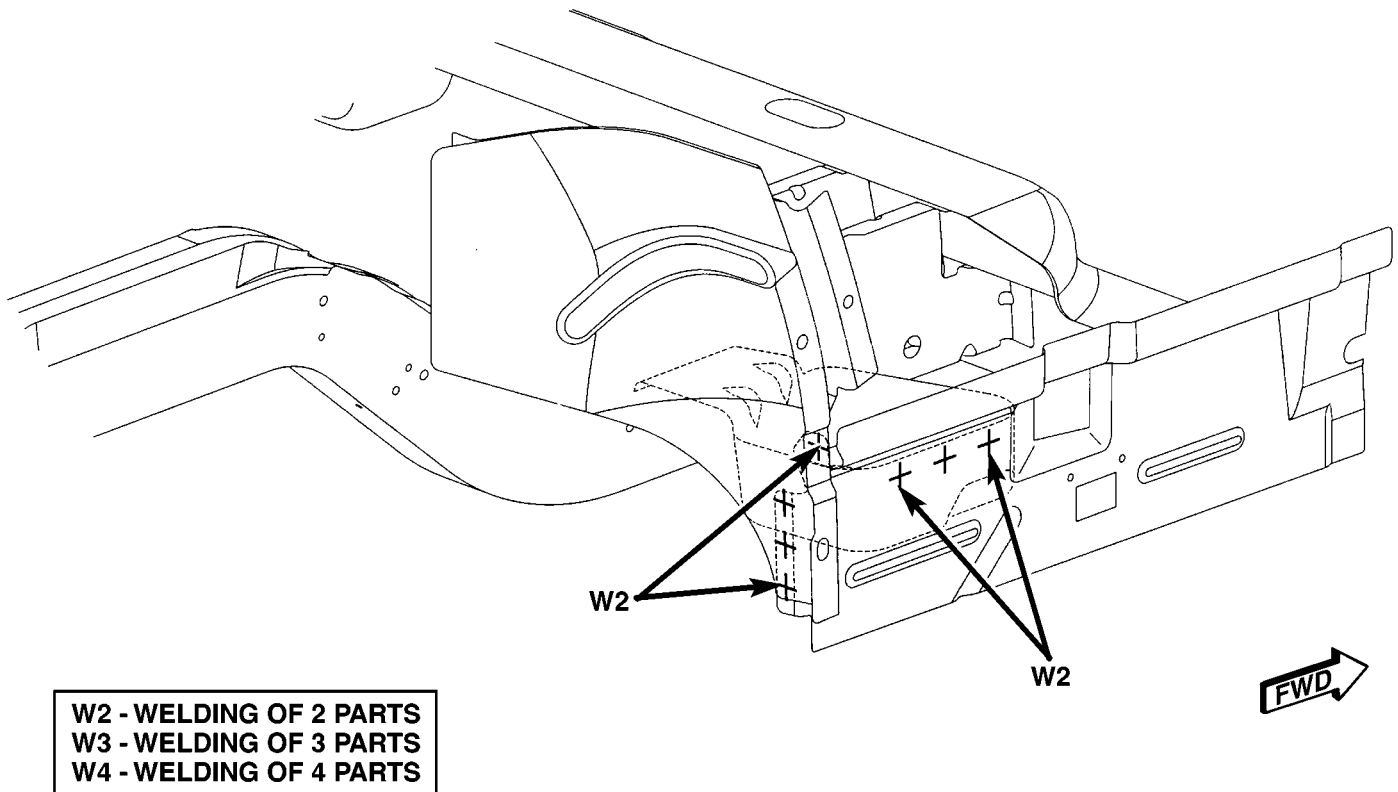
SILL EXTERIOR PANEL AND REAR RAIL EXTENSION TO INNER SILL EXTENSION
